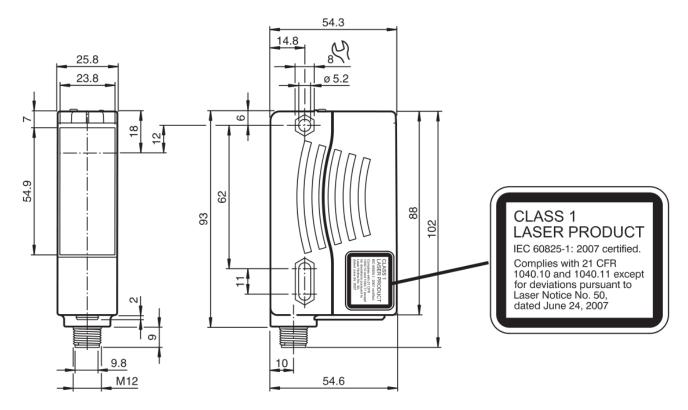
Laser Sensor (P/N: LGM-HEAD) Dimensions (mm)
